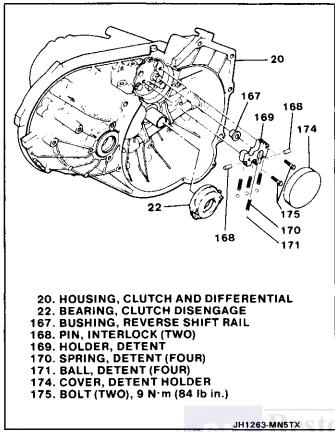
Shift Control Components, Clutch and Differential Housing
